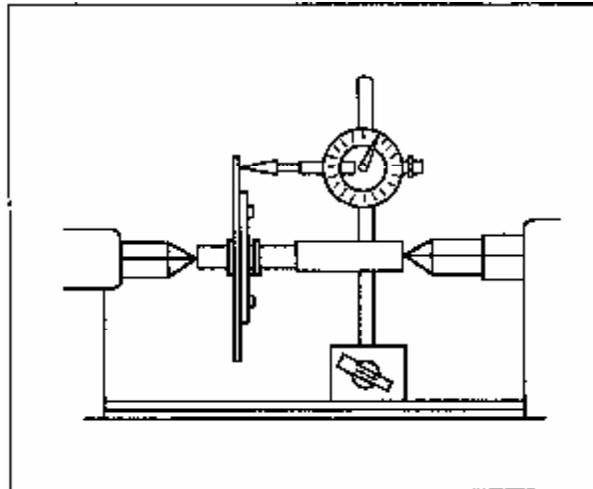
Check Run-out Tolerance of Clutch Driven Plate
